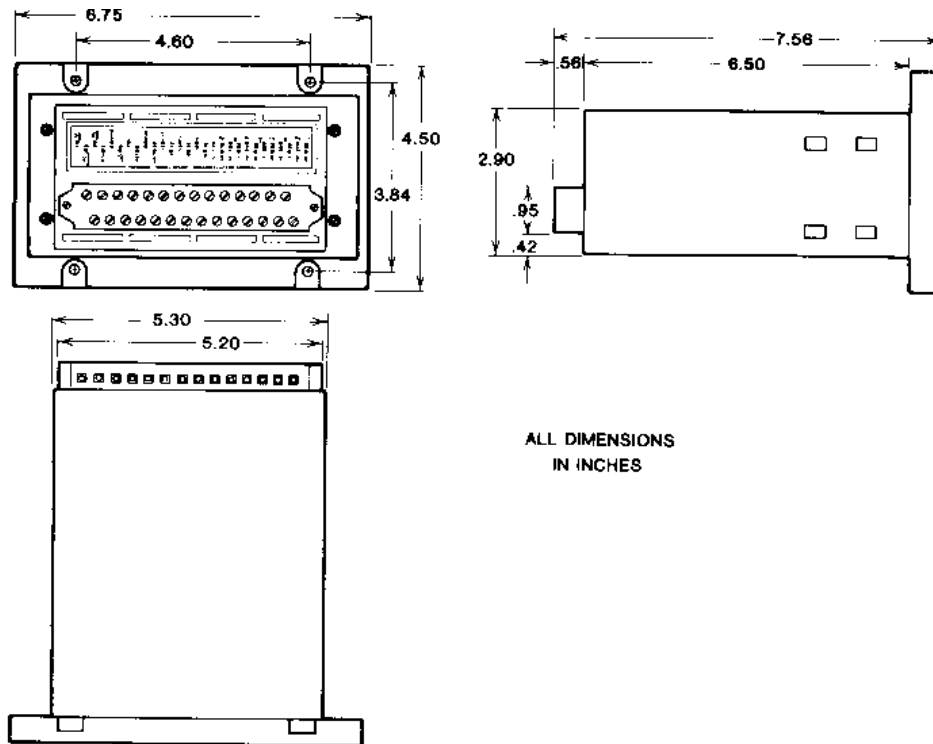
WP6220 and WP6320 DIMENSIONS
